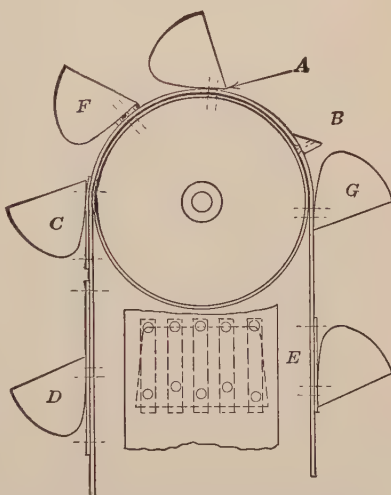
Devices to Protect Elevator Belts from Injury where Buckets are Bolted on.
